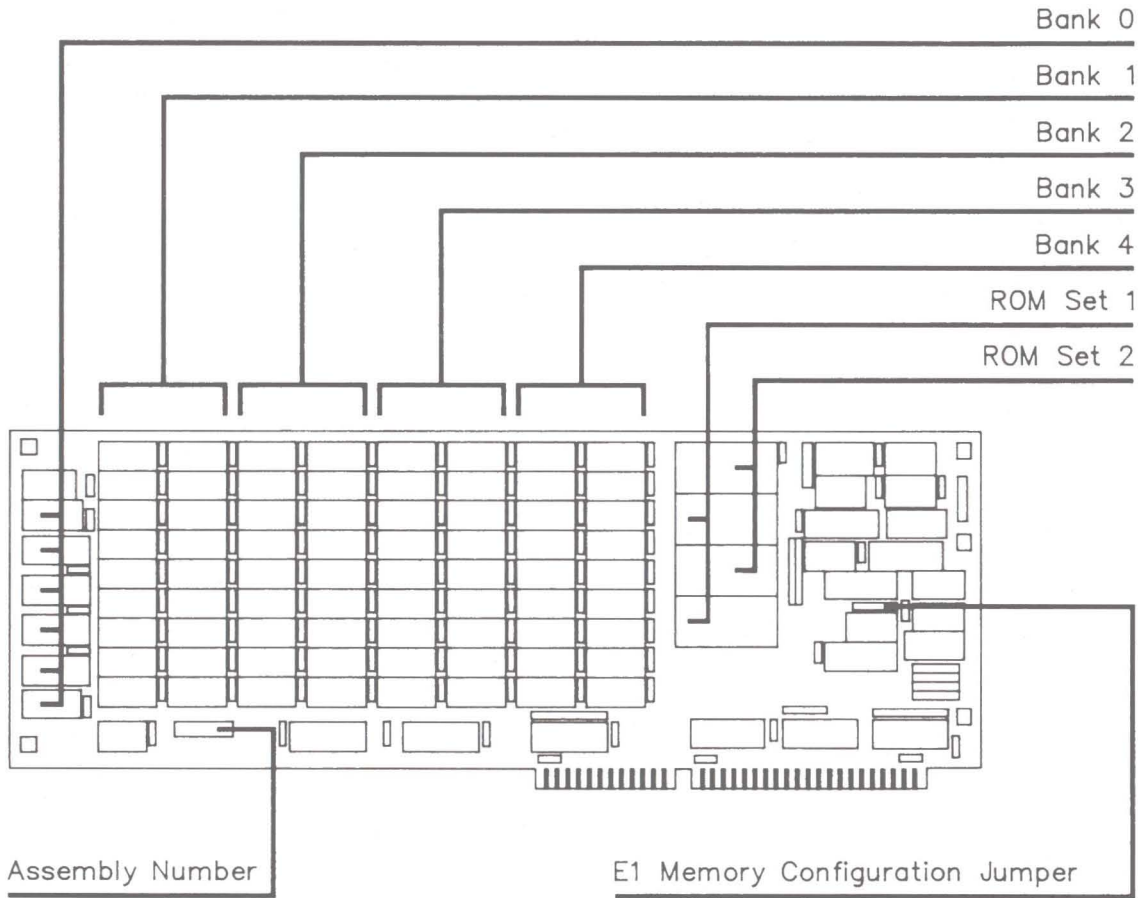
COMPAQ DESKPRO 286 System Memory Board Version 2 and Version 3 Component Layout
